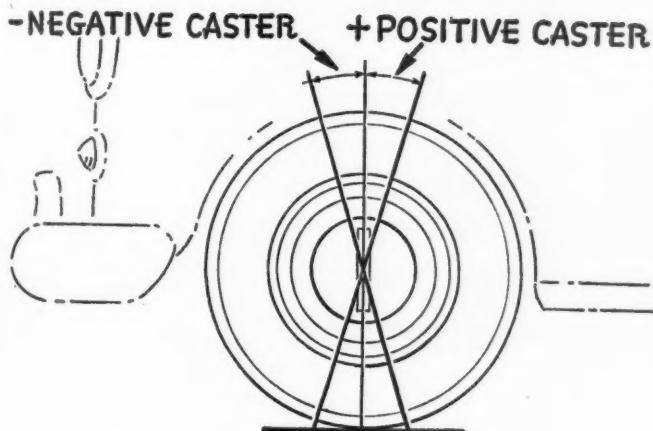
View of spindle and wheel showing direction of positive and negative caster.
